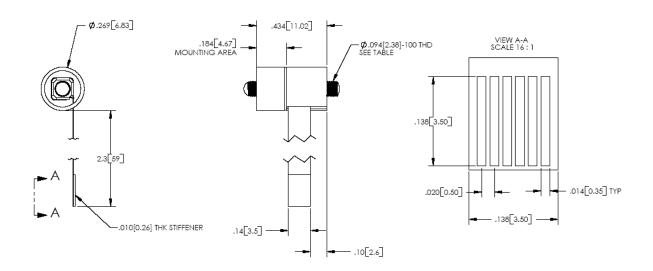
SQL 3.4-10 Dimensions and FPC Pin Out
